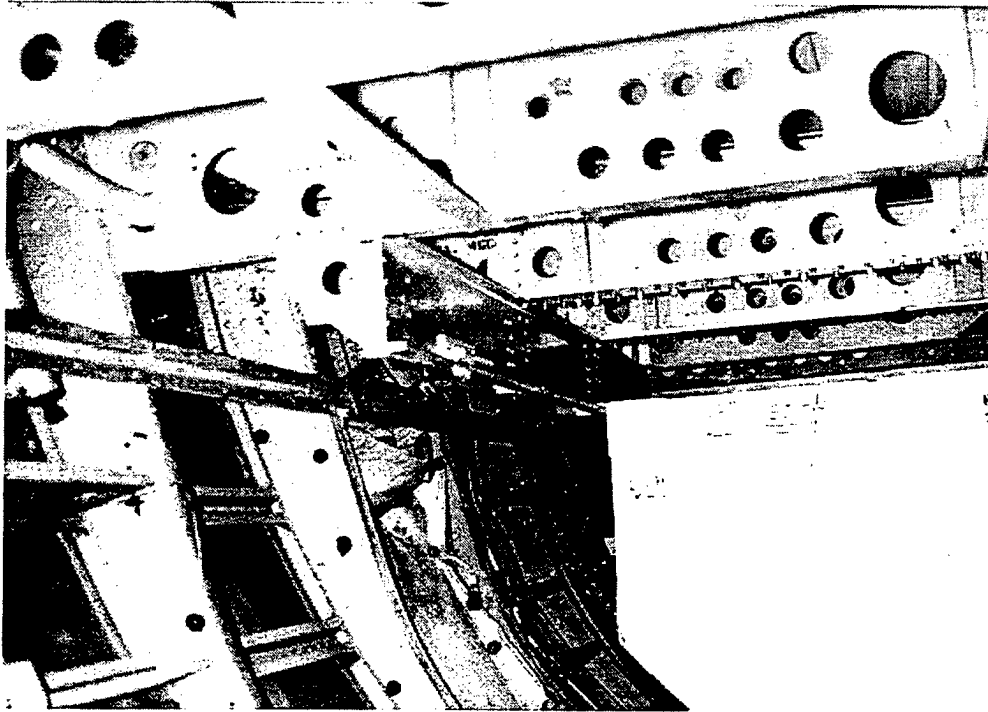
POSTTEST AUXILIARY FUEL TANK LEFT ATTACHMENT FRAMEWORK
